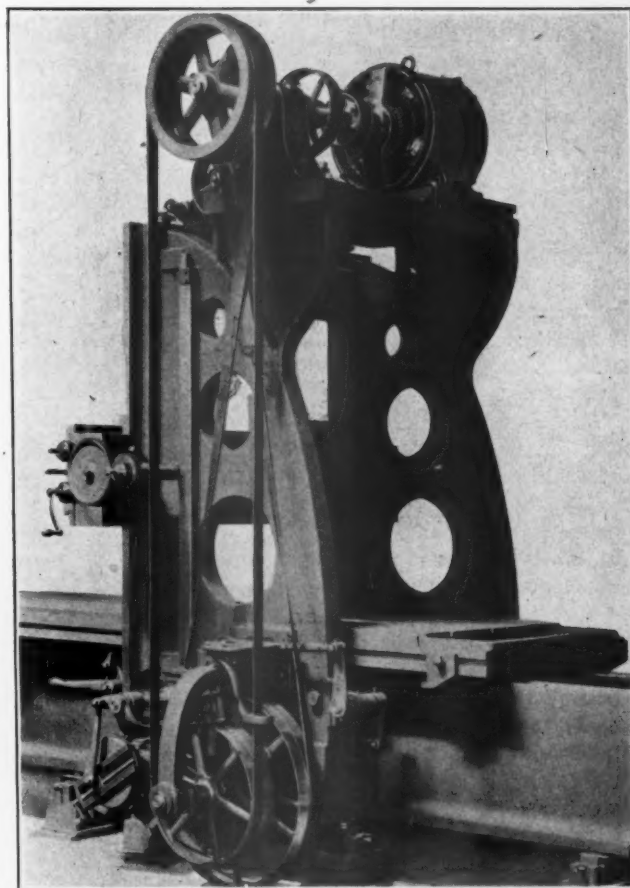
DIRECT-CONNECTED MOTOR-DRIVE UPON A GRAY PLANER, SHOWING USE OF FLYWHEEL. BULLOCK CONSTANT SPEED MOTOR.
